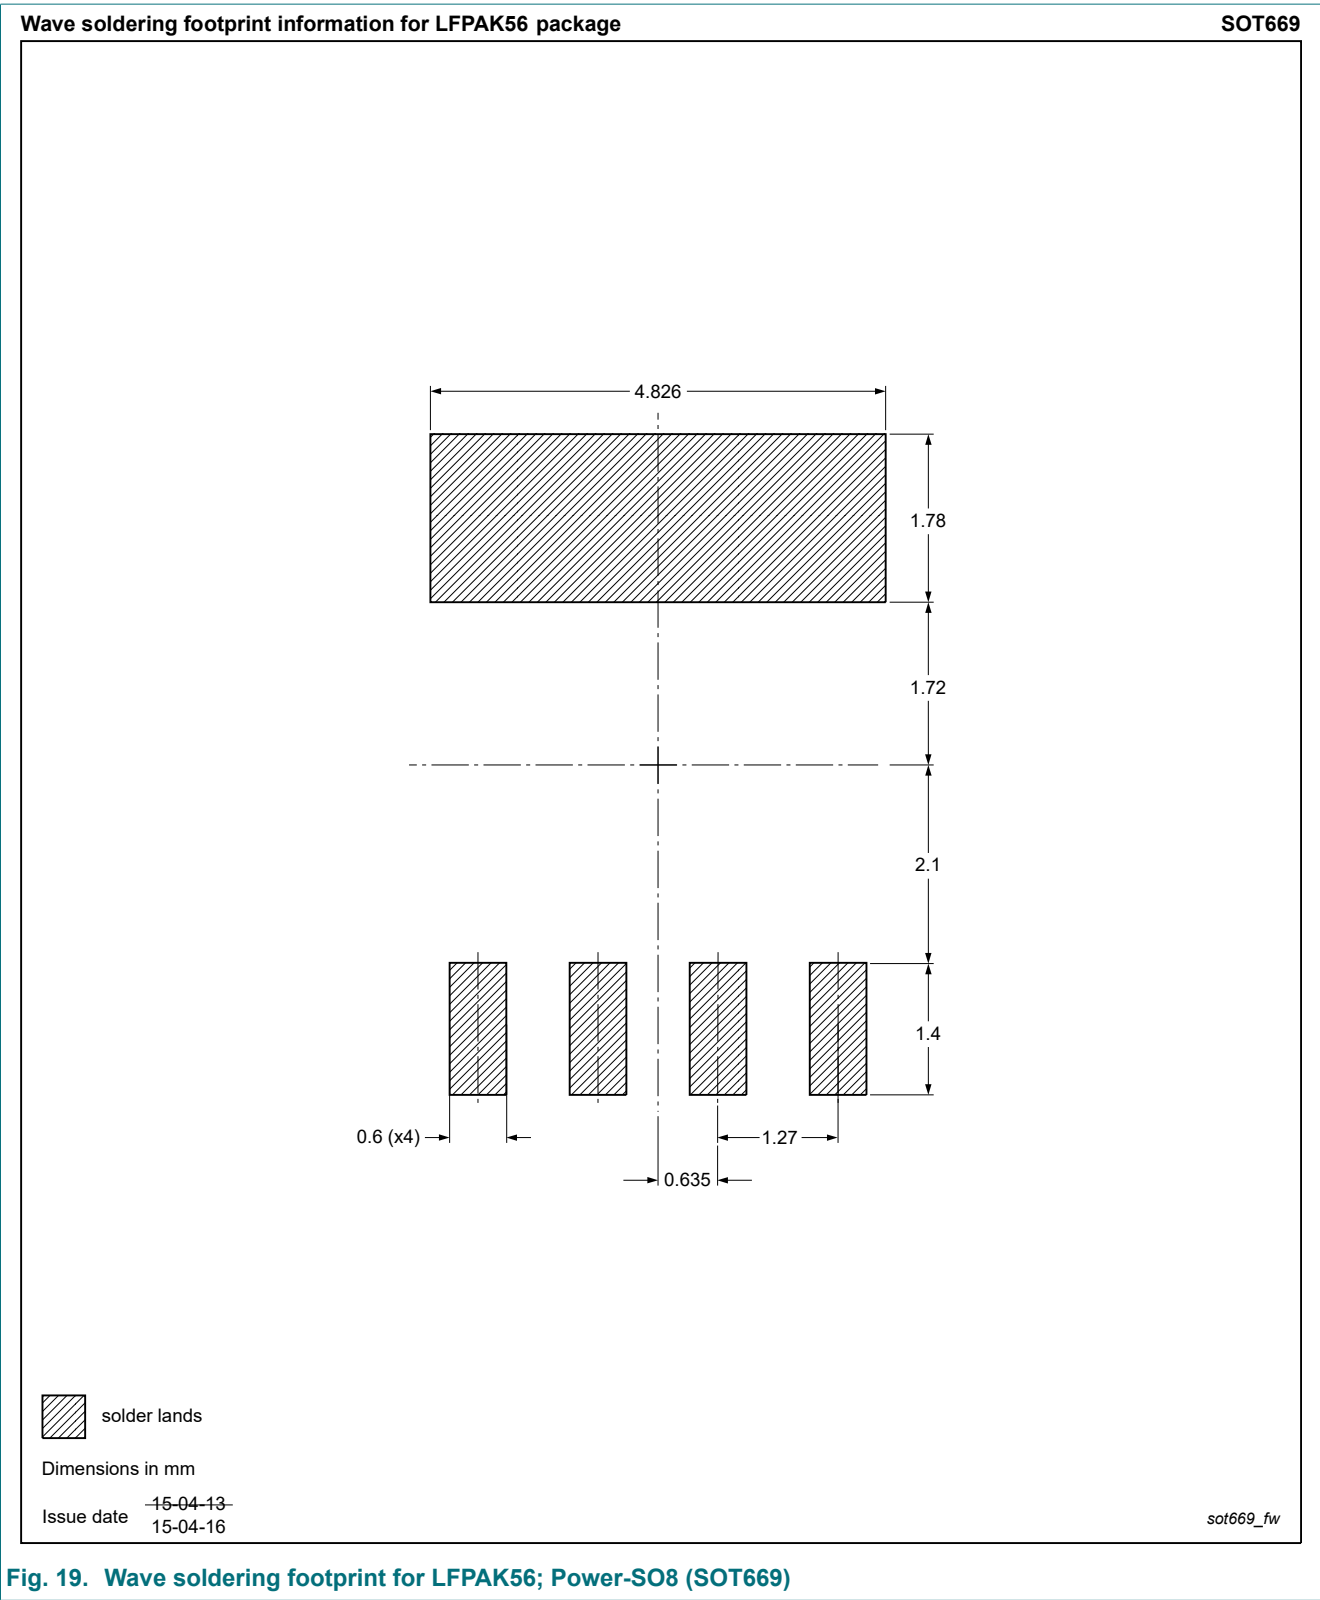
Wave soldering footprint for LFPAK56; Power-SO8 (SOT669)
